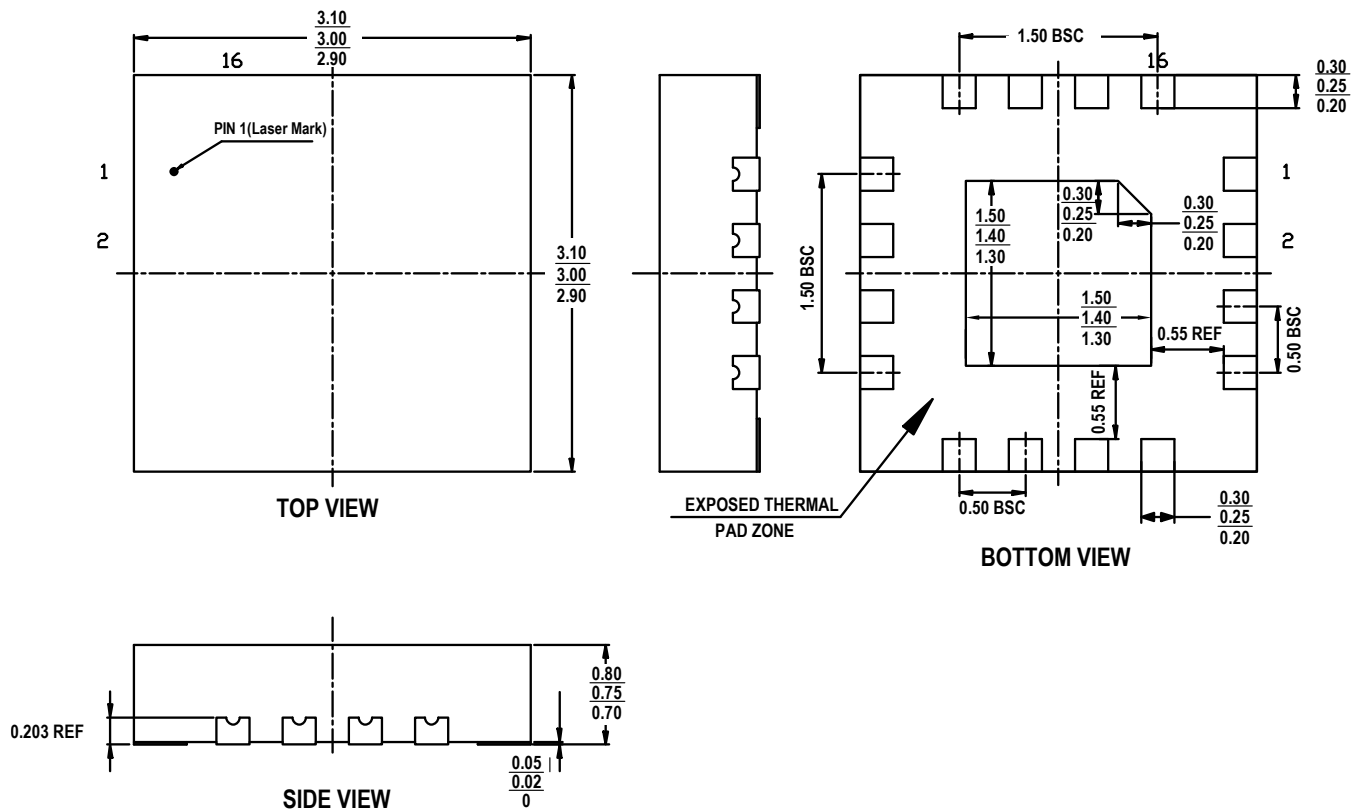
16-Lead QFN Package Dimensions shown in millimeters
